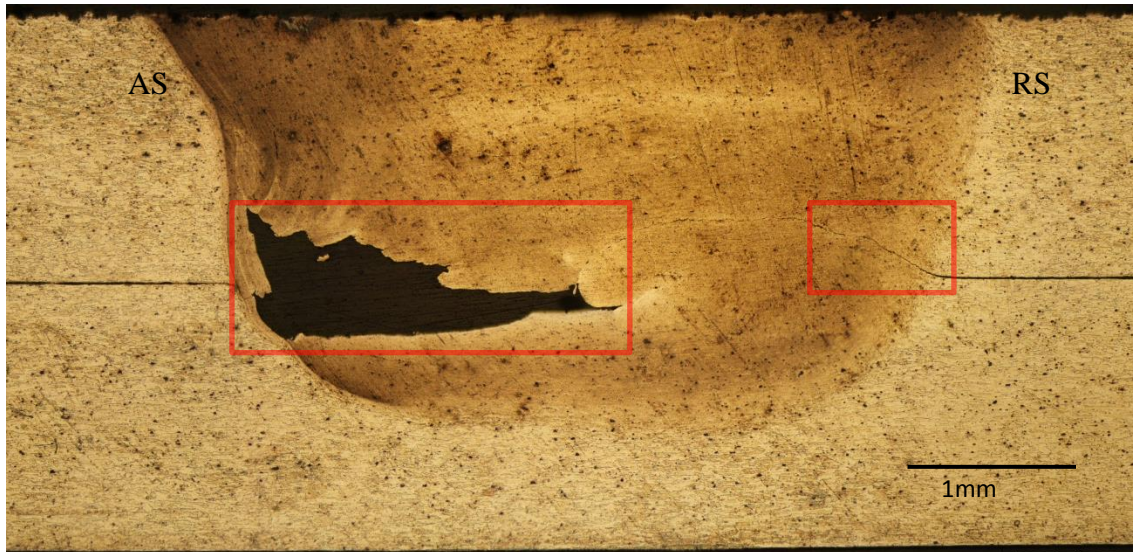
Metallographic picture of SSFSW #3757A welding sheet cross section at -500 rpm ,4.23 mm/sec, 10.68 kN tool 1(RH)
